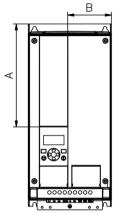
Vacon20 dimensions, MI4 - 5 Display Location
